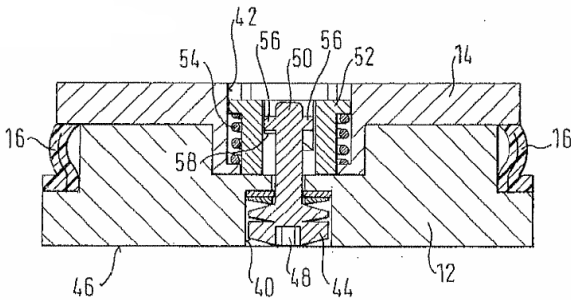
Sectional view of a cover arrangement in accordance with Fig. 4 in the assembled state with compressed sealing element.
